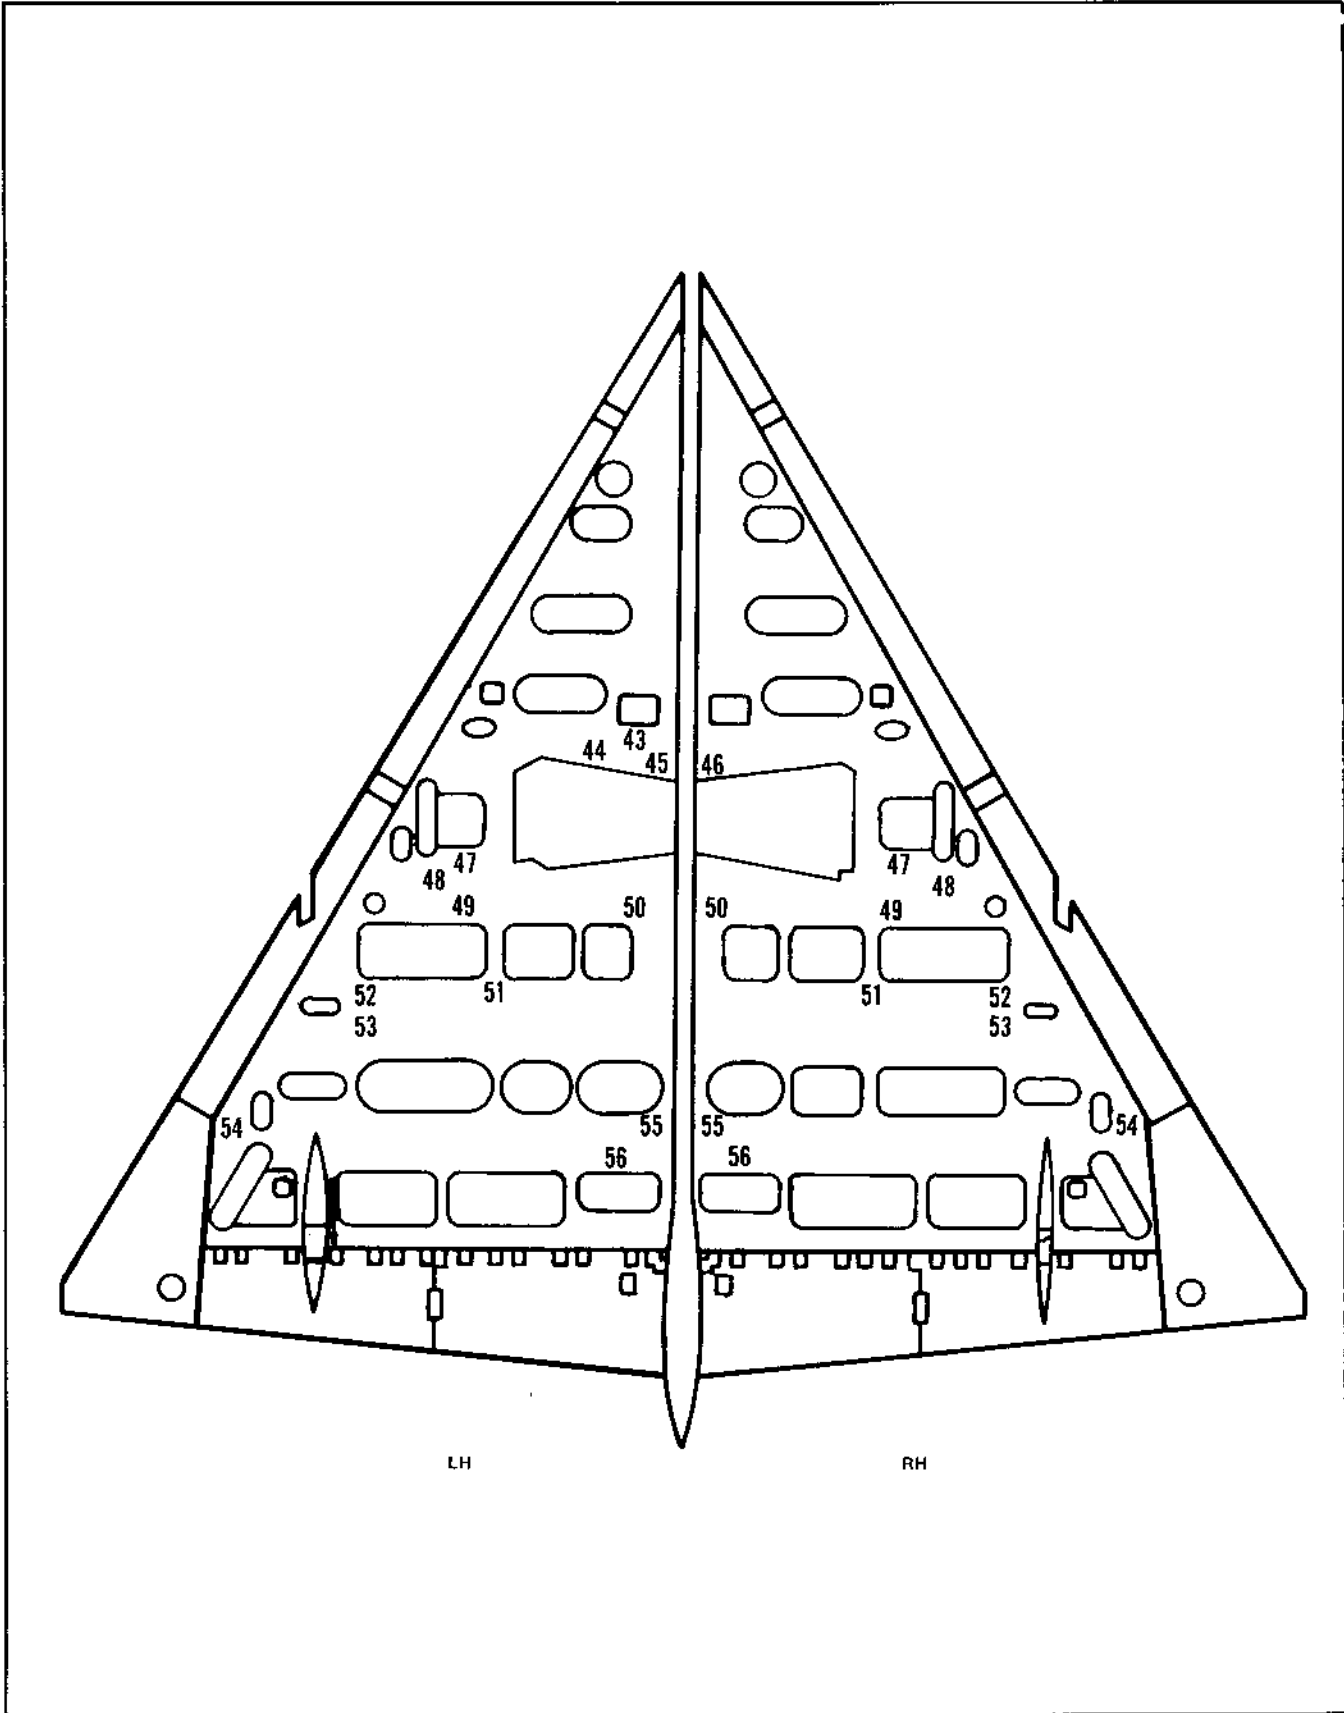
Wing, Lower Surface Markings (Sheet 5 of 5)
